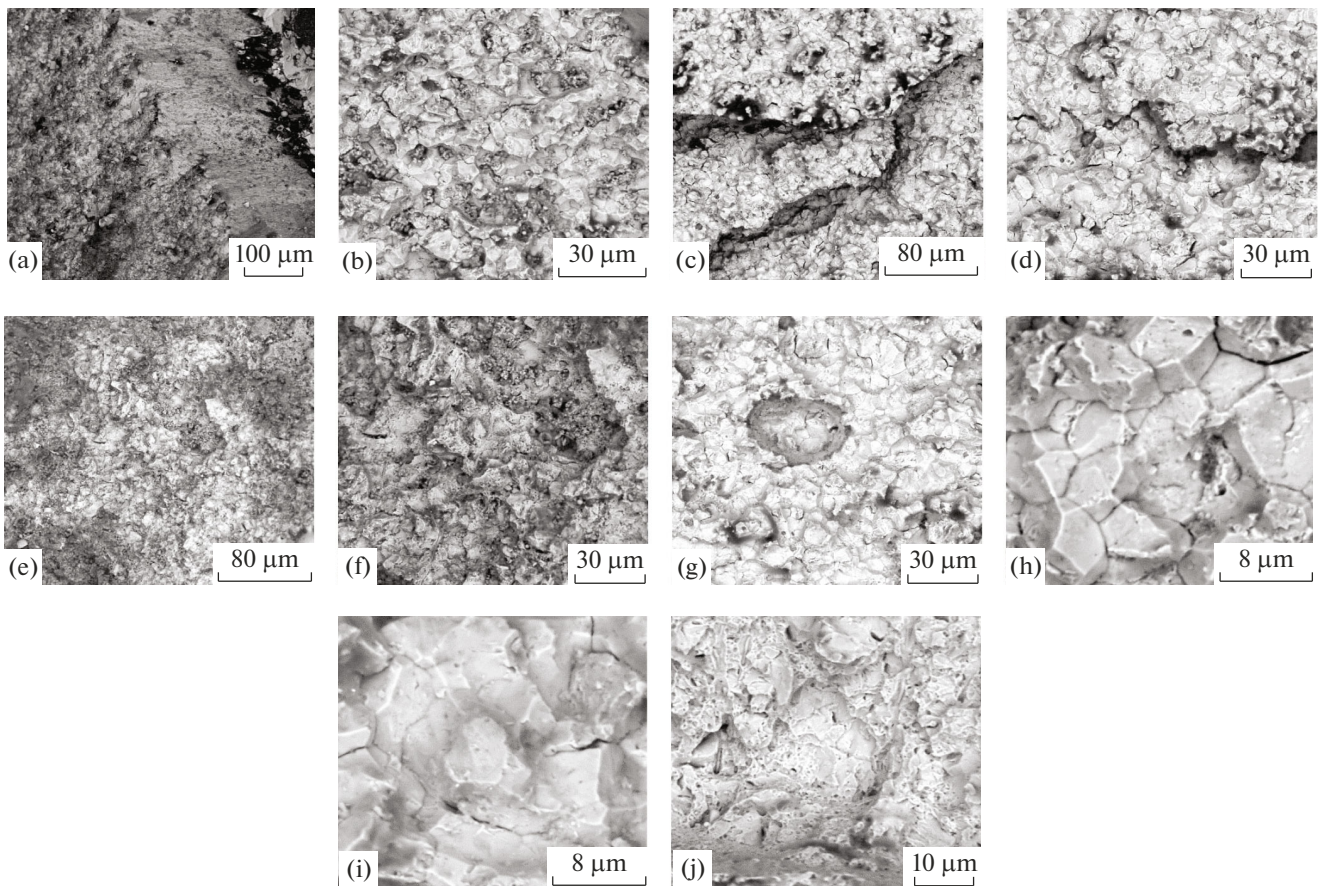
Electron fractograms of the fracture surface of the spring: (a, b) fracture nucleus; (c, d) fracture development, scarring zone; (e, f) fast fracture; (g) bubbles; (h, i) intergrain facets, cleavage facets, quasi-cleavage facets, splitting, multiple cracks, pores; and (j) splitting by sulfides, pits.
